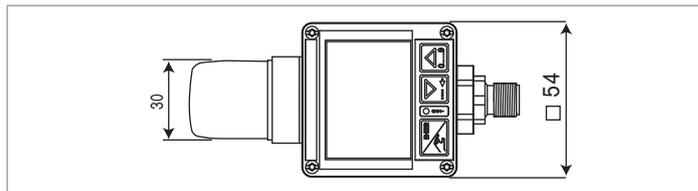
Dimensions [mm] of the SE32 electronic module, top view
